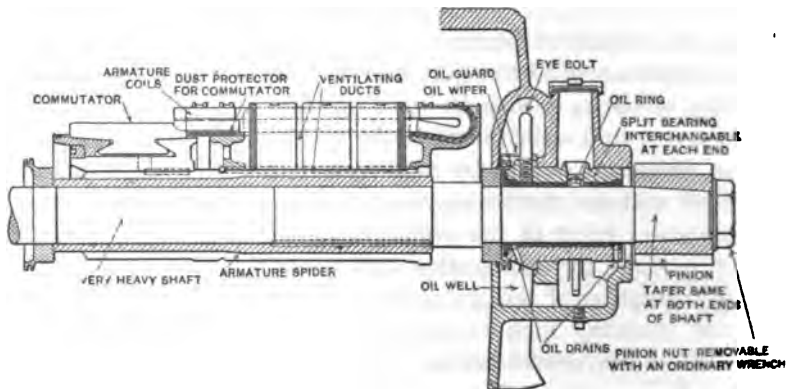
SECTIONAL VIEW OF ARMATURE AND BEARING HOUSING
